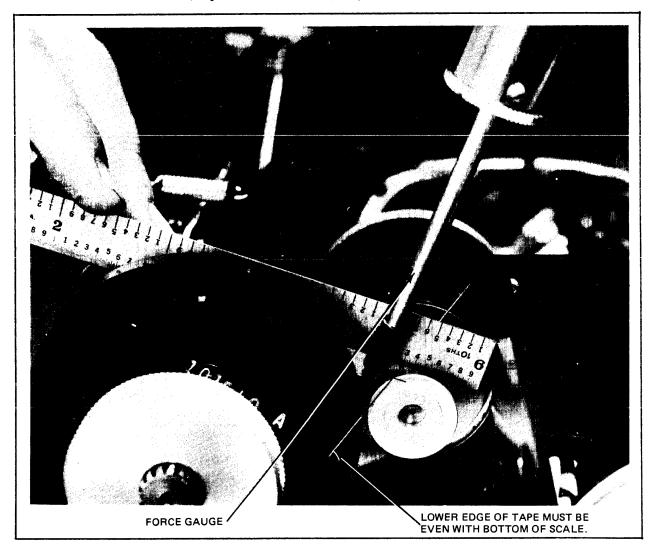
Checking Paper Feed Belt Tension, Using Force Gauge
